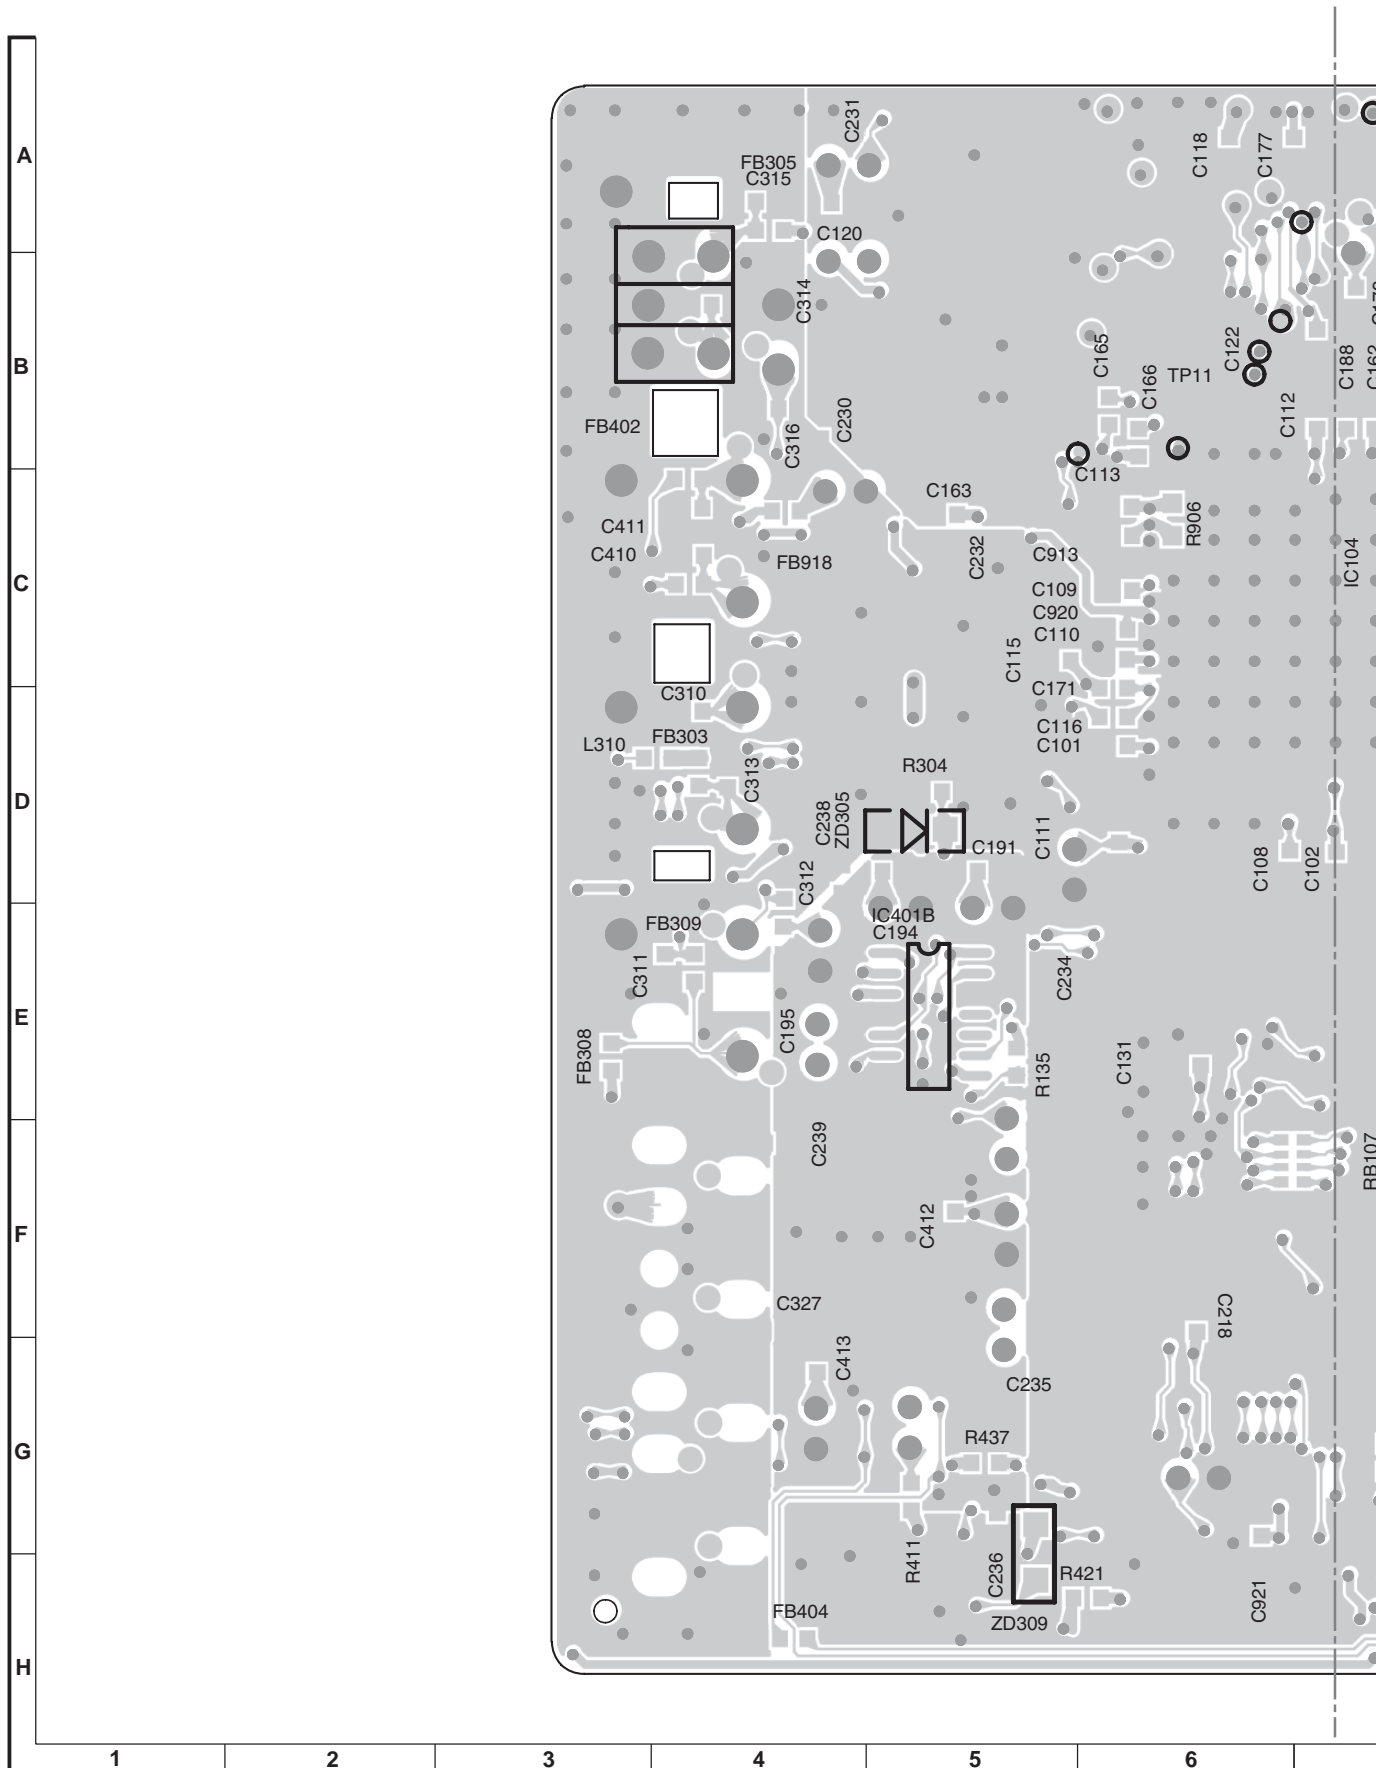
WIRING SIDE OF MAIN PCB (BOTTOM VIEW) (1/2)
